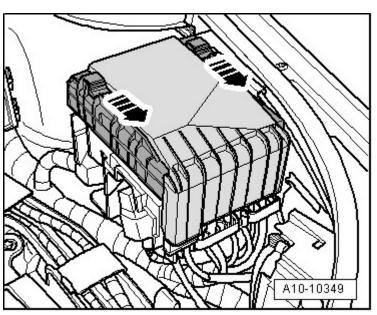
Identifying E-Box Cover And Latches Courtesy of AUDI OF AMERICA, LLC
